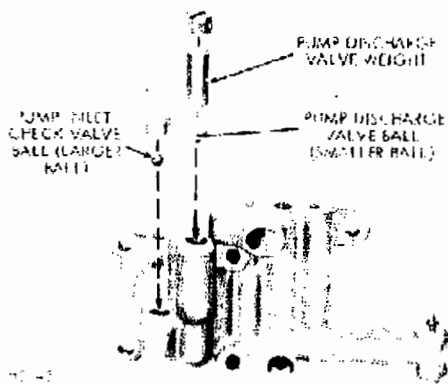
Installing Pump Inlet and Discharge Valve Balls
